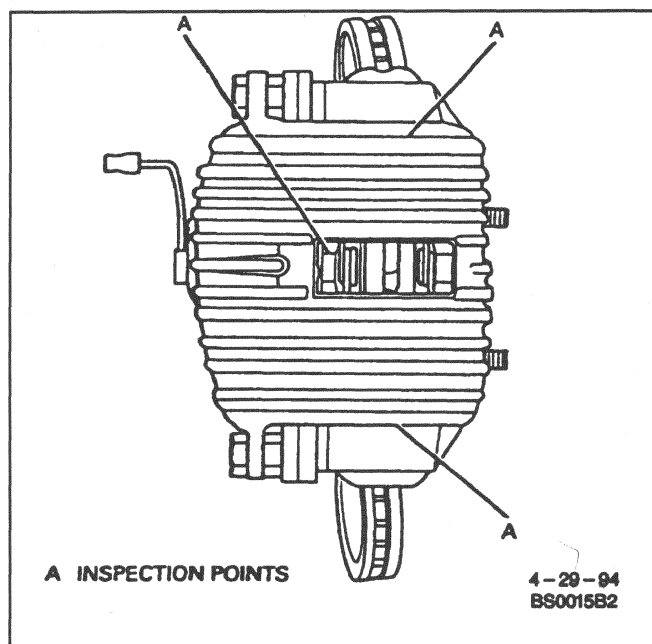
Rear Disc Brake Inner and Outer Pad Inspection
